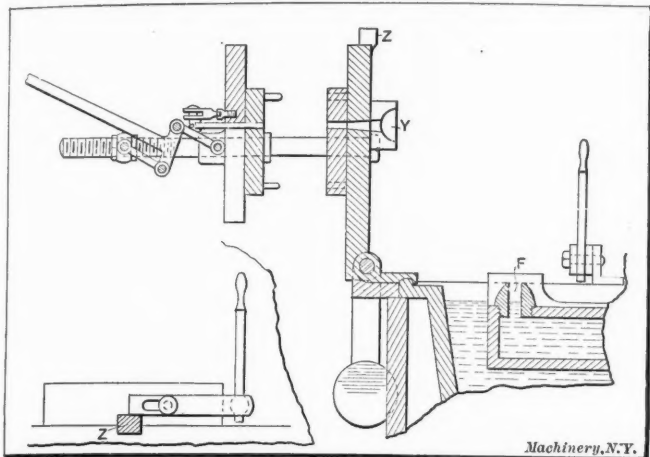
Tilting Mold Table and Method of Parting the Mold
